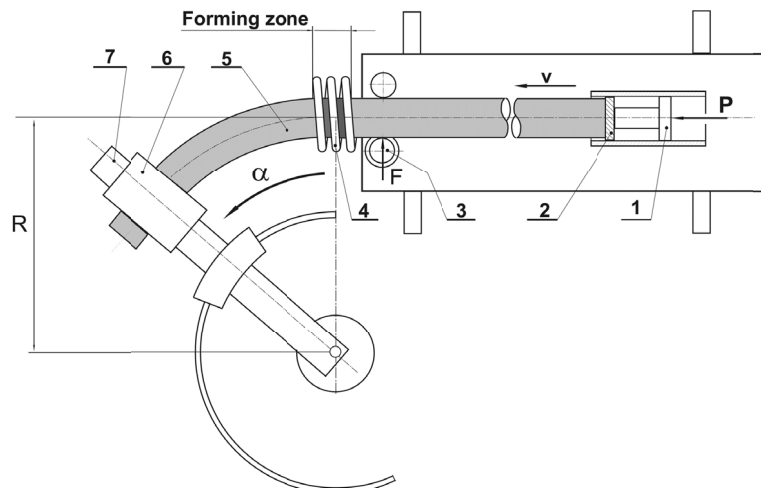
Diagram of a tube bender with induction heating: 1 – Tube pusher, 2 – Clamping piece, 3 – Guiding rollers, 4 – Inductor, 5 – Tube being bent, 6 – Mechanism for the tube end clamping, 7 – Forming arm, P – pushing force
